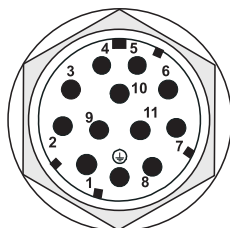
Receiver machine interface /R2, Hirschmann plug (view of the pins)
